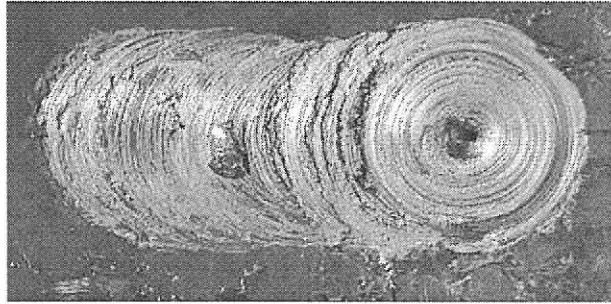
Appearance of the friction stir welded specimen.
